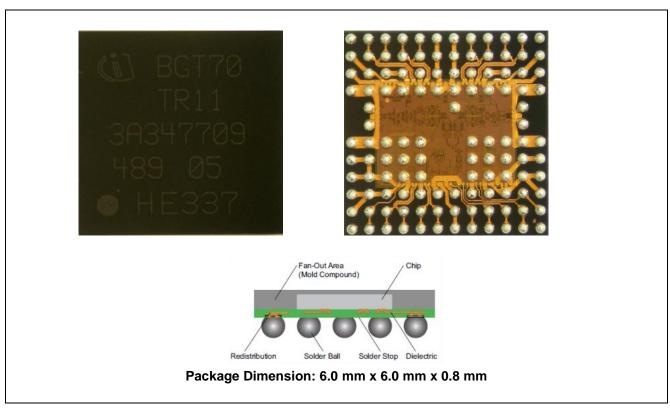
Top View (left), Bottom View (right) and Side View of BGT70 in eWLB Package
